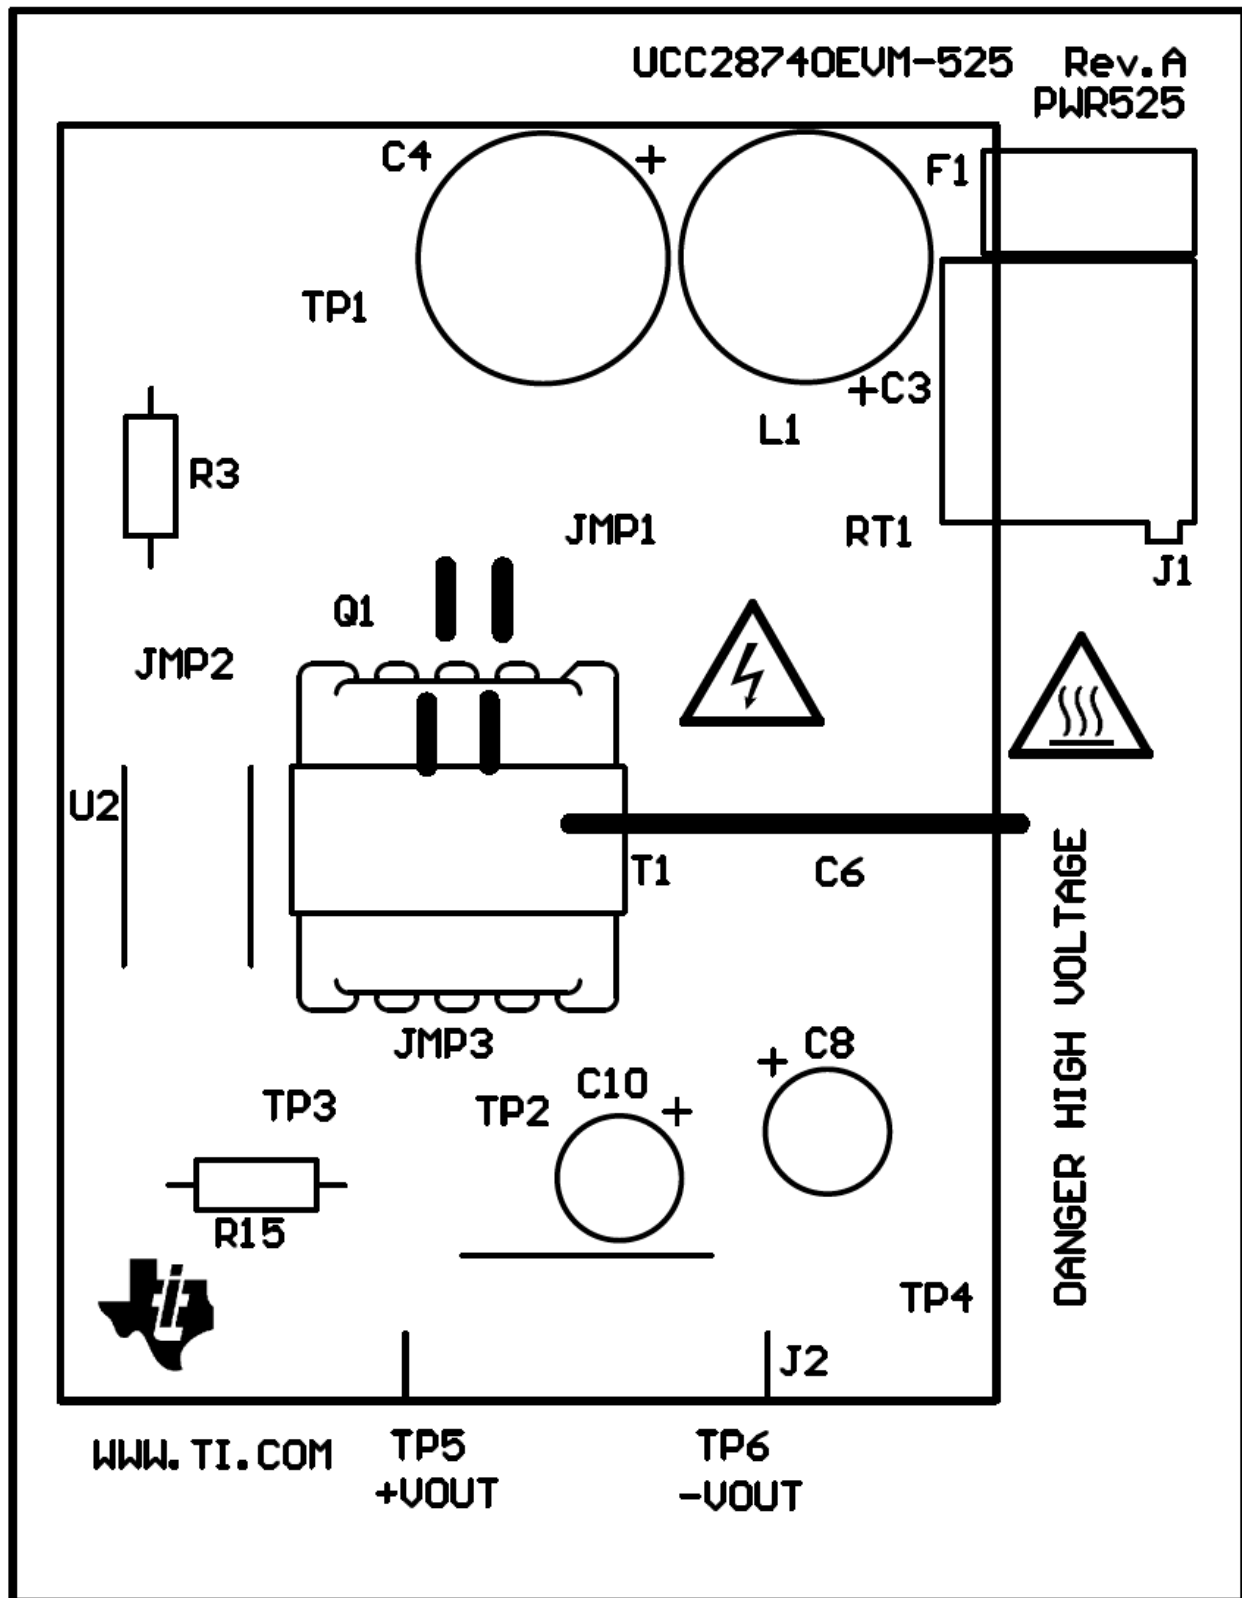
UCC28740EVM-525 Top Layer Assembly Drawing (Top view)
